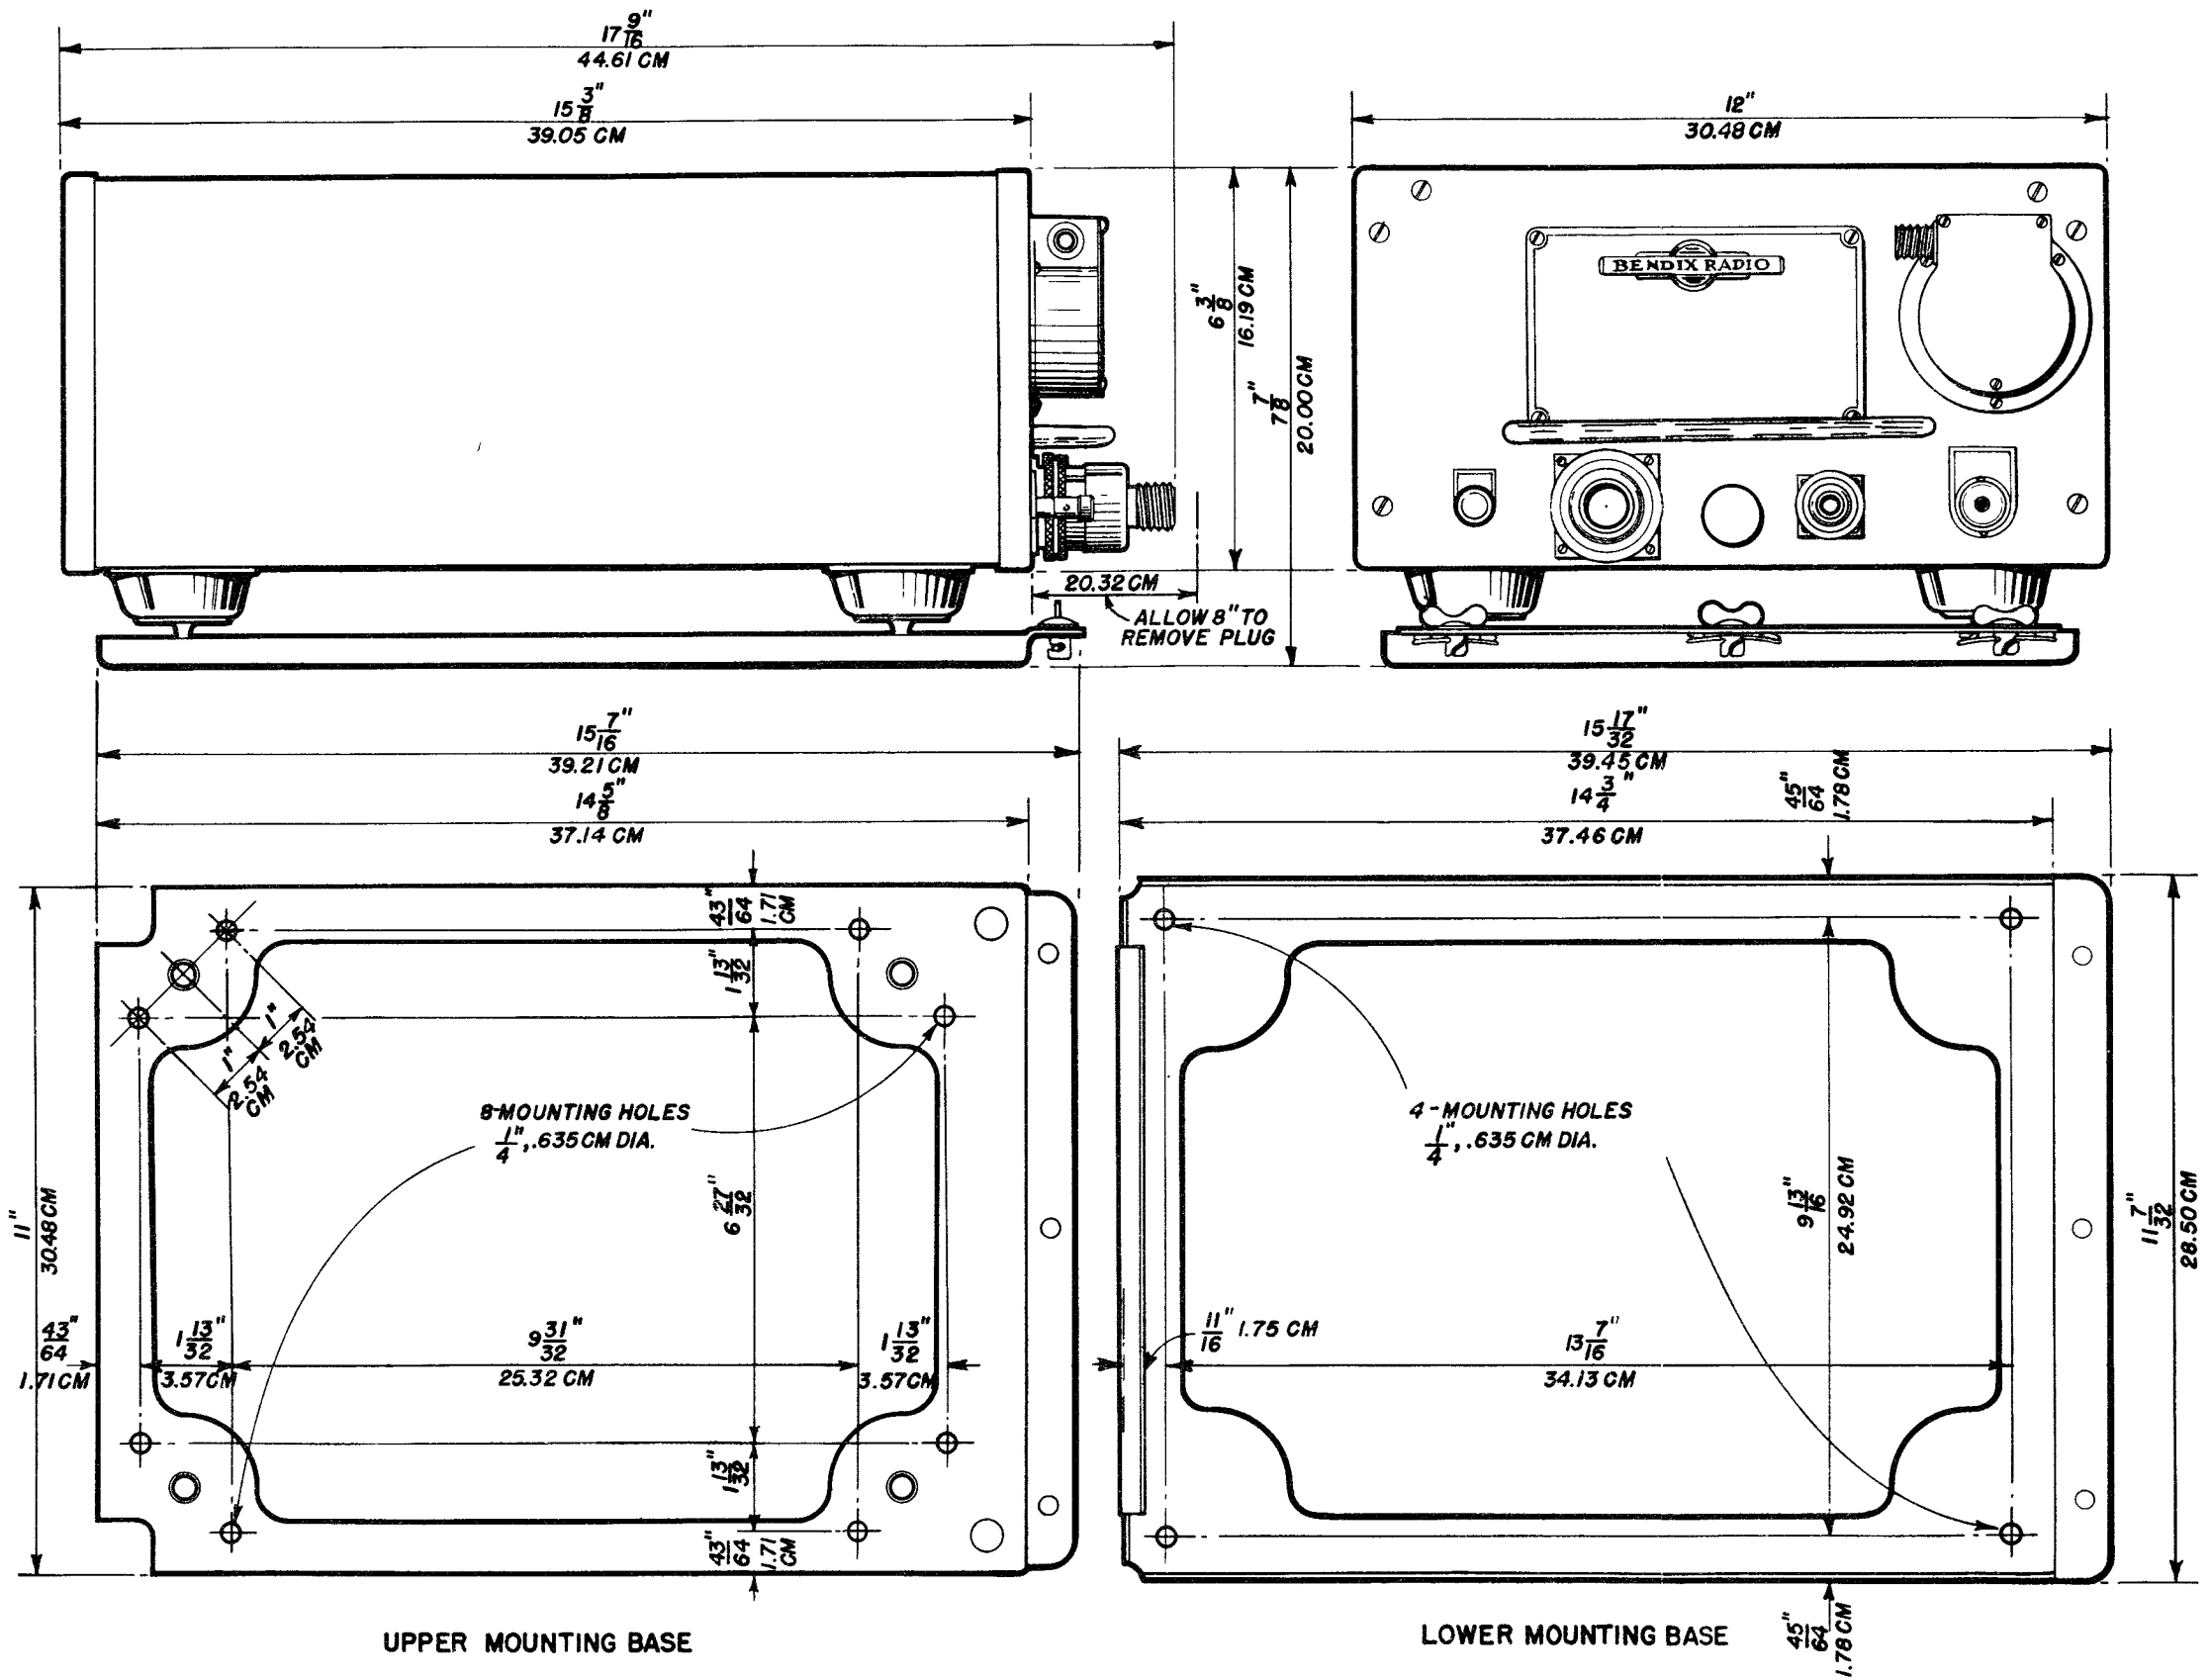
OUTLINE DIMENSIONS. MN-26 RADIO COMPASS UNITS
